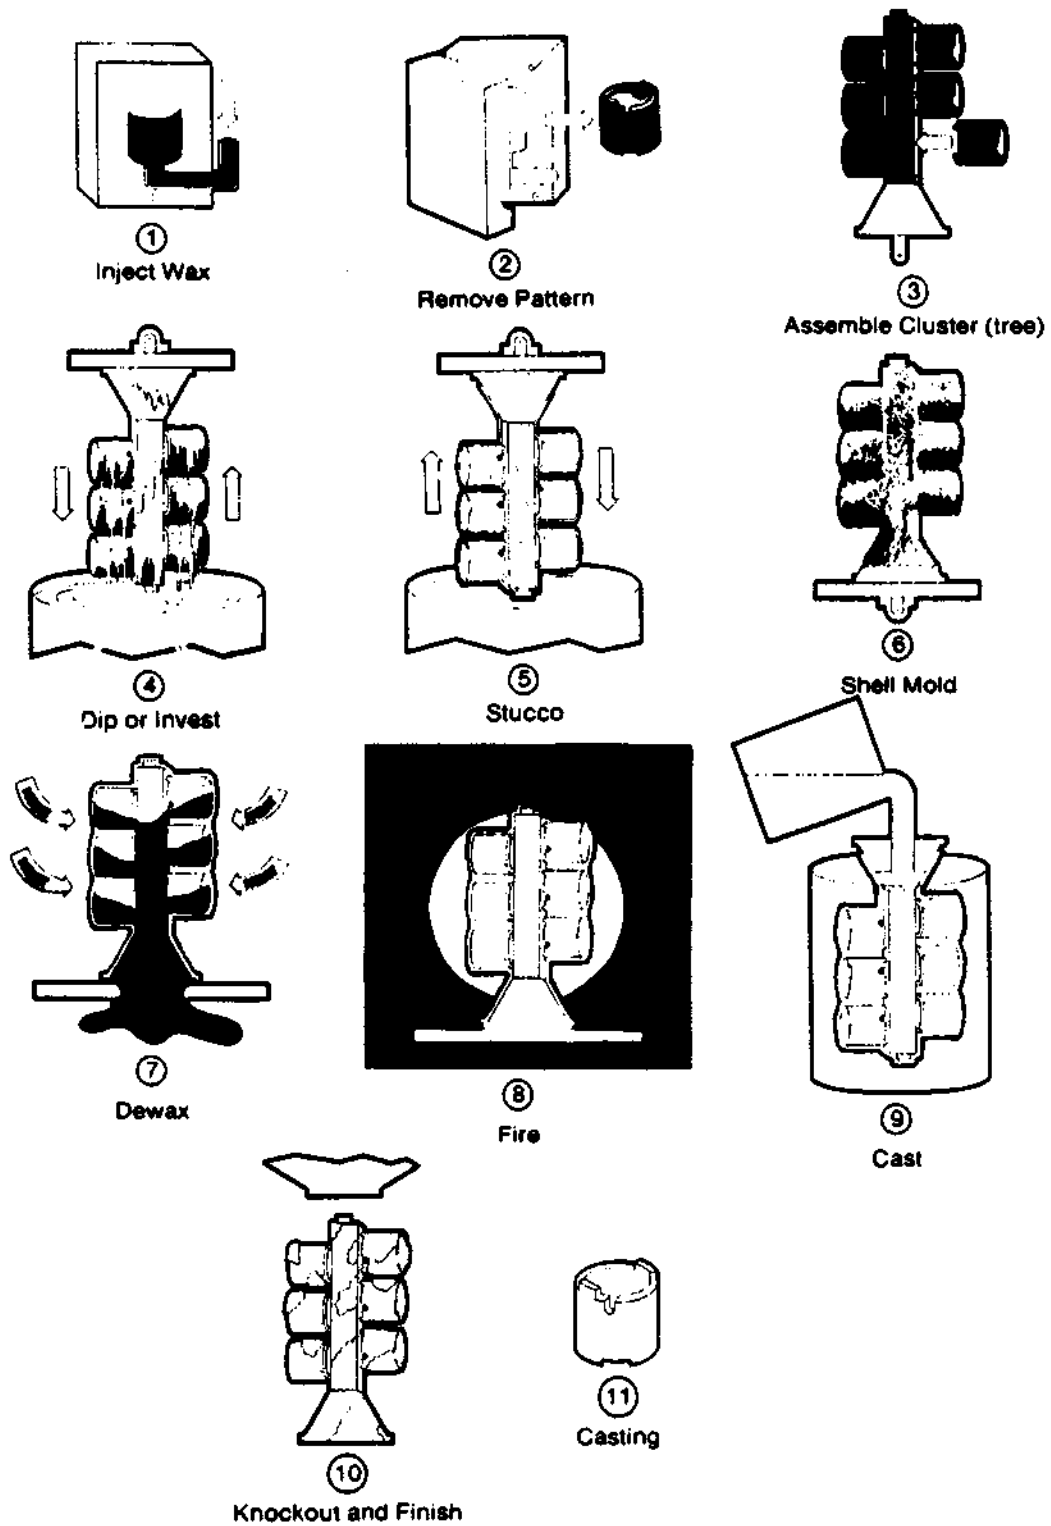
G2 A typical sequence of steps for the shell method of investment casting. (Courtesy Investment Casting Institute, Dallas)
